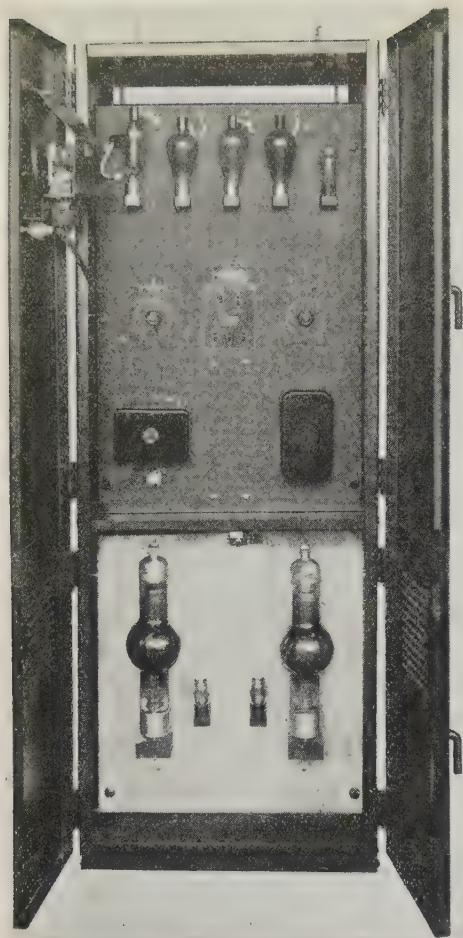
Control panel for electron tube spot - welder and line - welder
